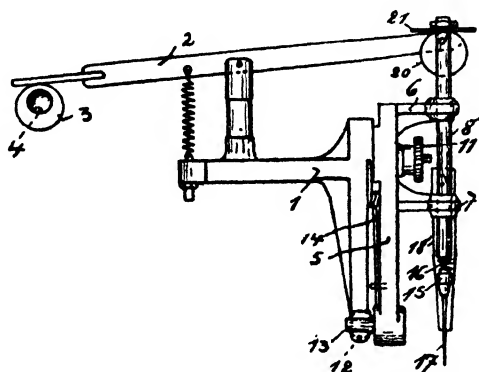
Unit of vertical polishing machine, model Soldixa
